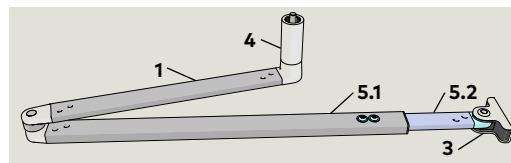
J12 – Splined push arm assembly, 500 mm, 8" - 12" reveal
